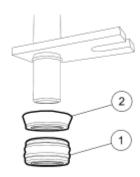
Identifying Transmission Fluid Cooler Tube Backing Ring & Seal Courtesy of FORD MOTOR CO.
